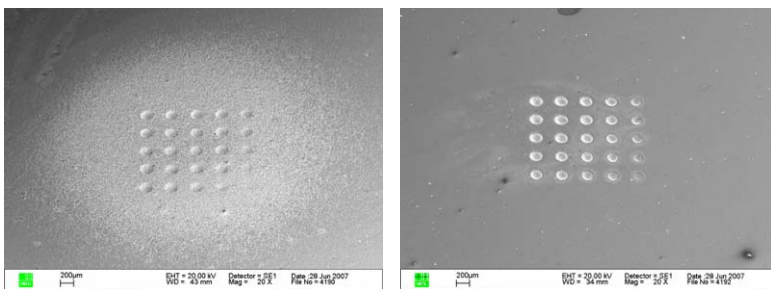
left: pit array machined without air assistance; right: pit array machined with air assistance, (pits with different machining parameters)
